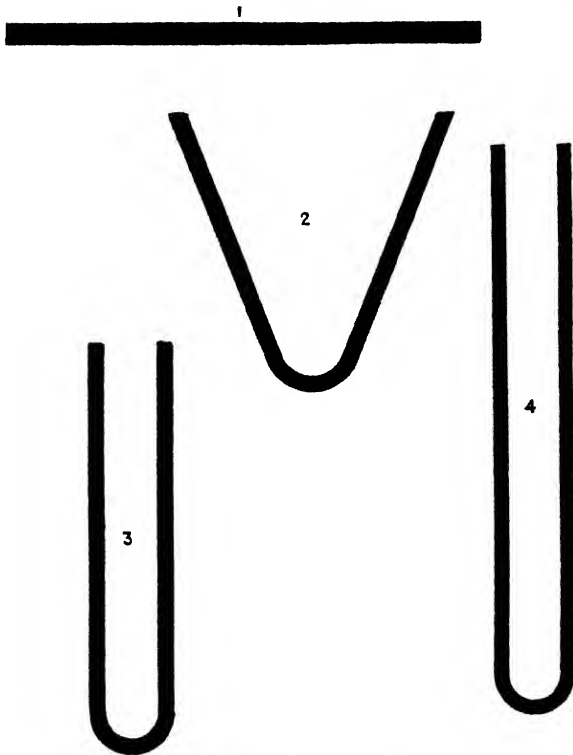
Steps in making a seamless tube by distorting a plate.
